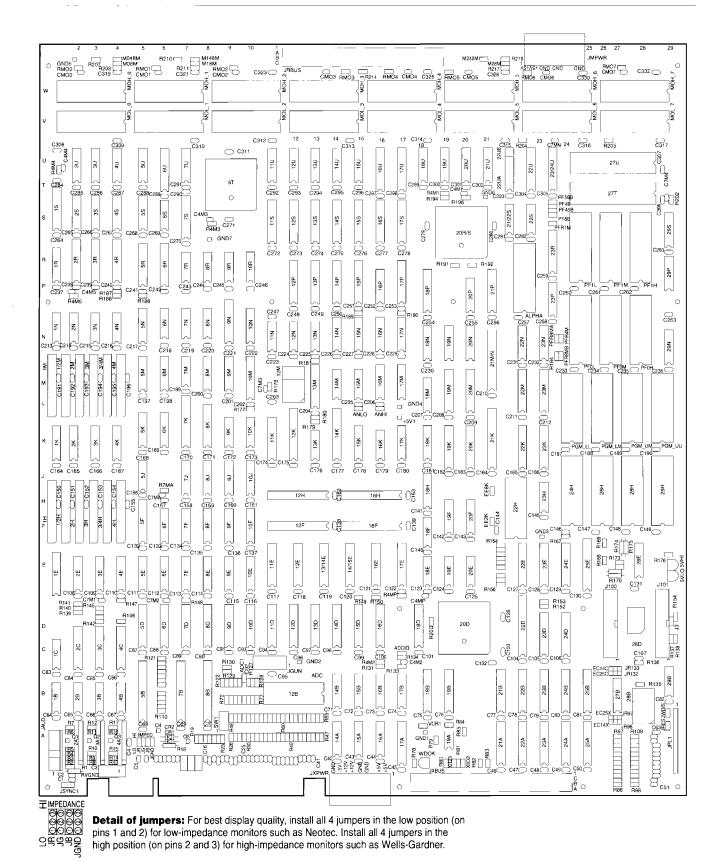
Primal Rage Game (GT) PCB Assembly
